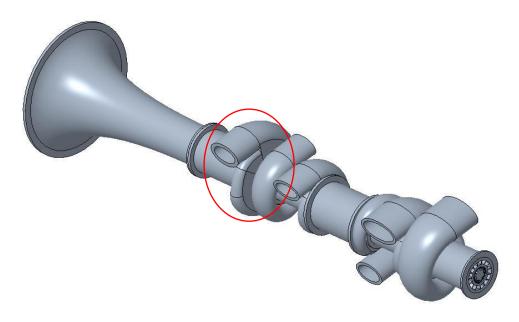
TURBINE'S SPIRAL DIFFUSER IN TURBOCHARGER ASSEMBLY
